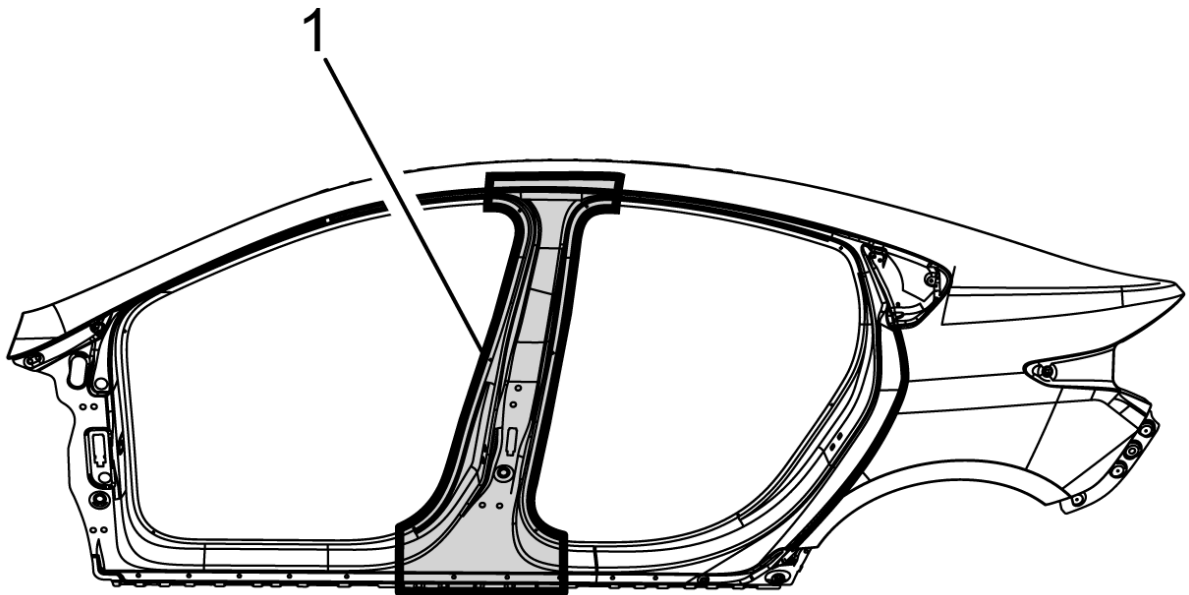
Center Pillar Of Body Side Outer Panel Sectioning Area
